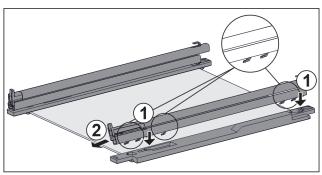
Glass shelf with rails and retaining parts Install rail with damping mechanism:
